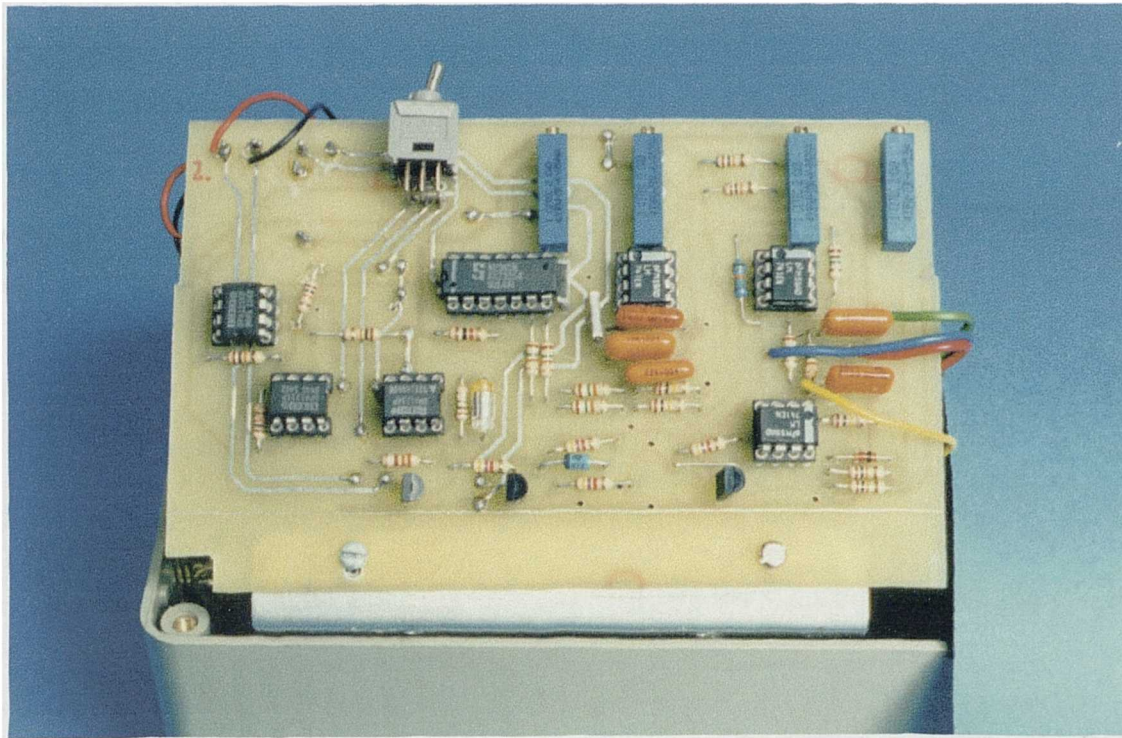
Photograph of the PCB designed to implement phase-locked loop technique
